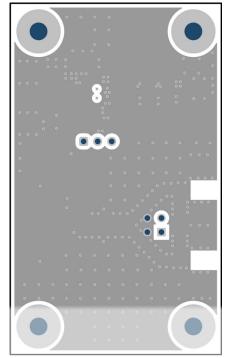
PCB Layout Example from LMK6 EVM, Figure 12-3. PCB Layout Example from LMK6 EVM, Top Layer GND Layer
